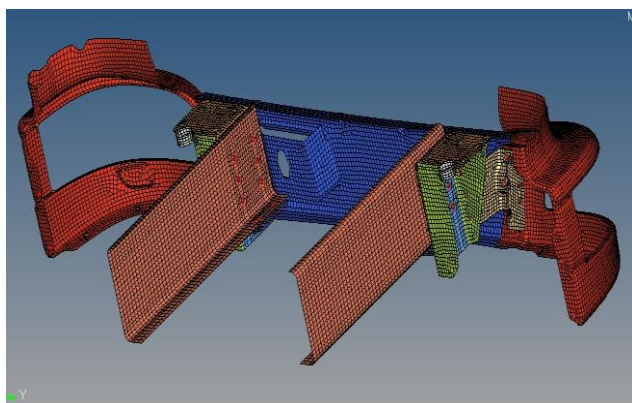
meshed model of bumper system assembly (rear view)
